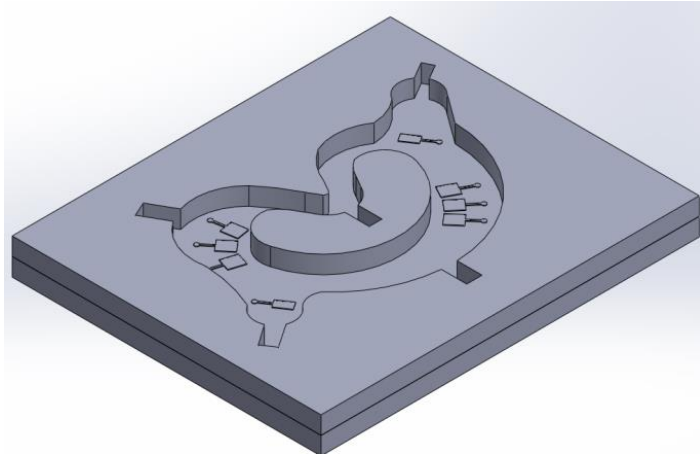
Closed Loop Valve Layer Master Mold Design for PCB
